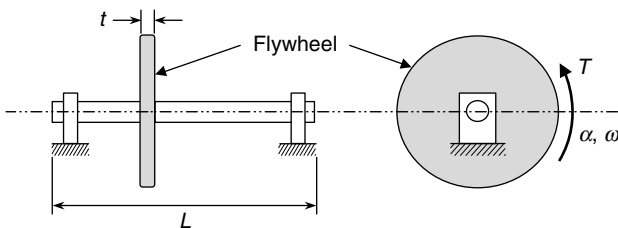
Solid disk flywheel on a rotating shaft.
